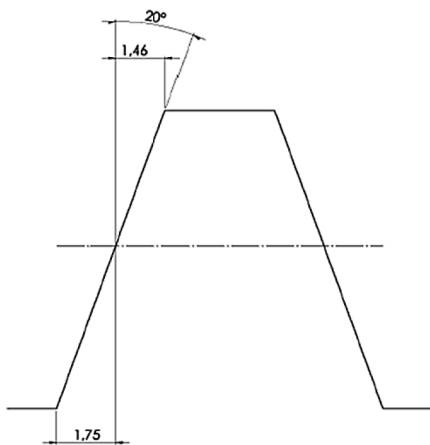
Theoretical profile of worm gear thread (linear dimensions are in millimeters)
